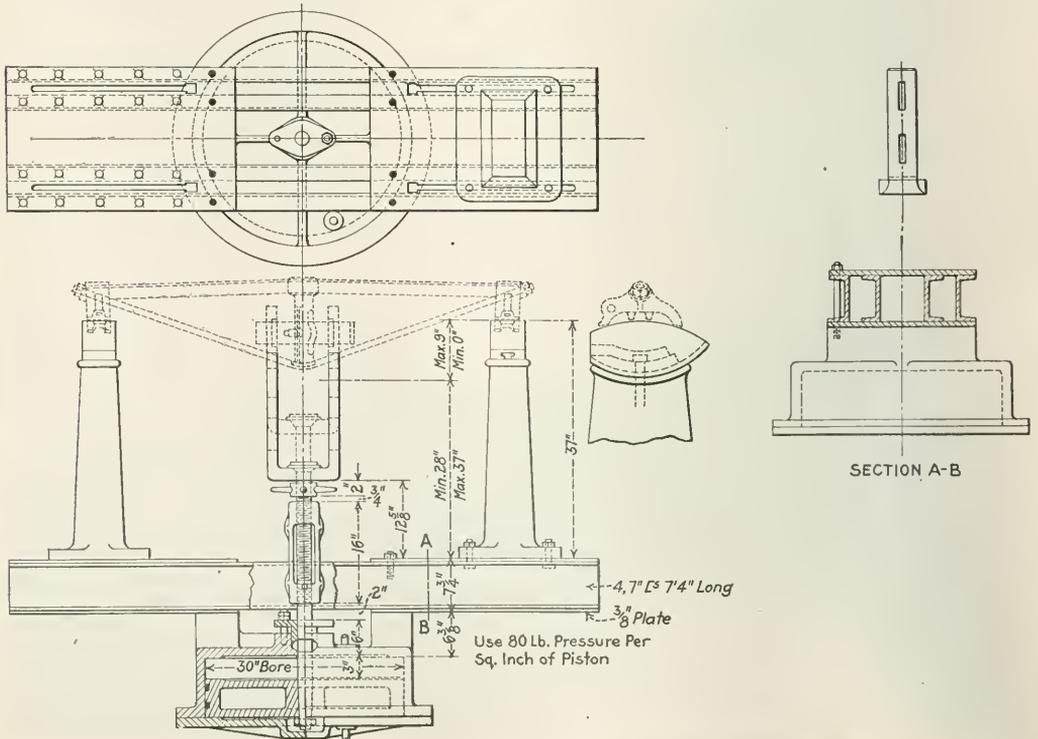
Brake Beam Testing Machine, 50,000 lb. Capacity
